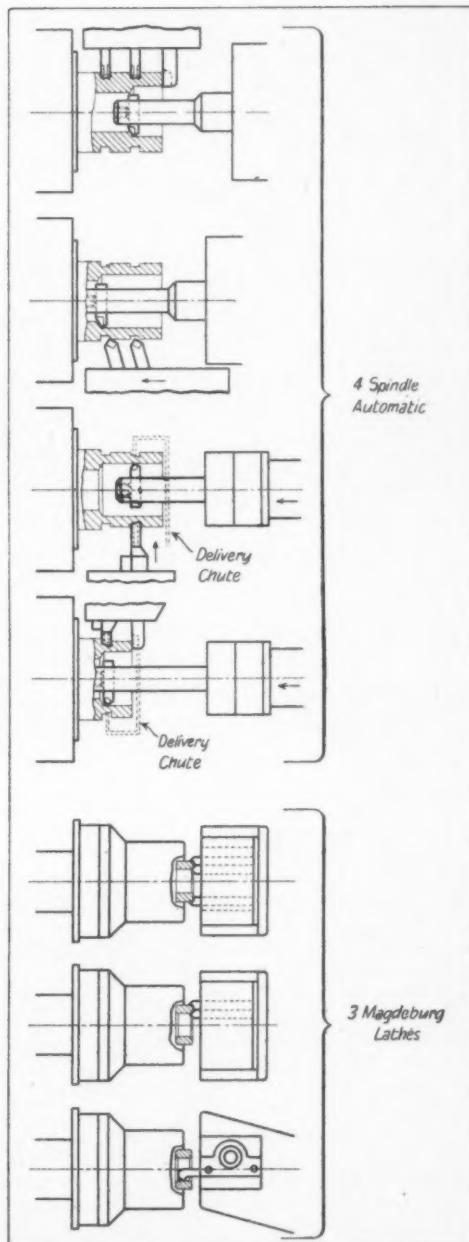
Operation Layout for Machining Ball Bearing Rings from Tube
